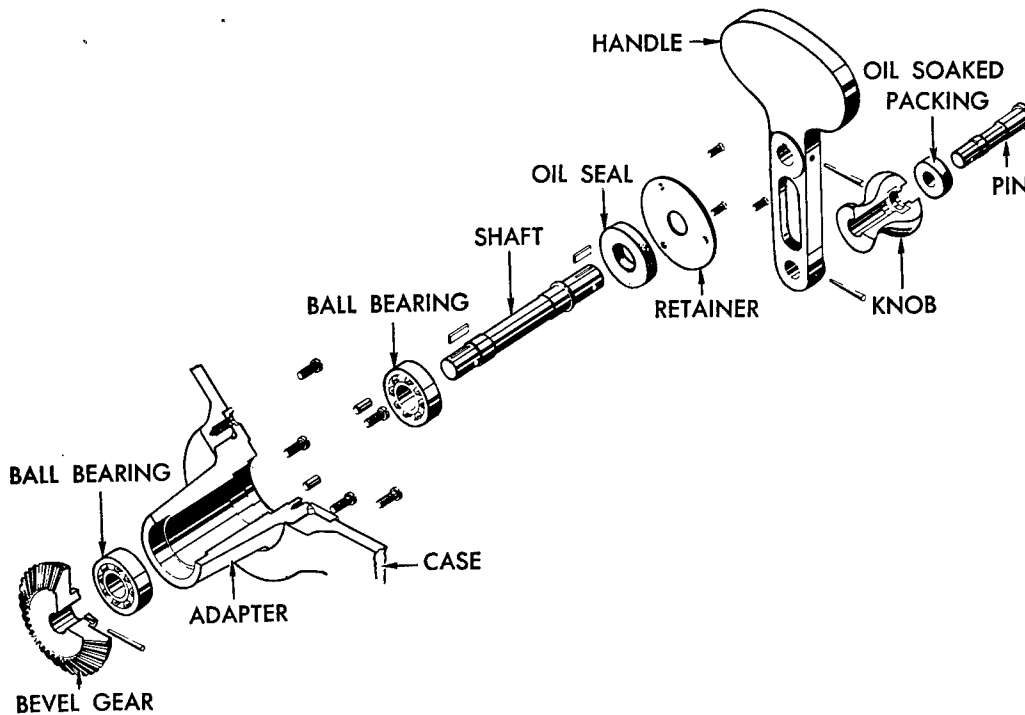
An instruction illustration showing a typical exploded view. The treatment may be used to identify parts and to show disassembly and reassembly.
